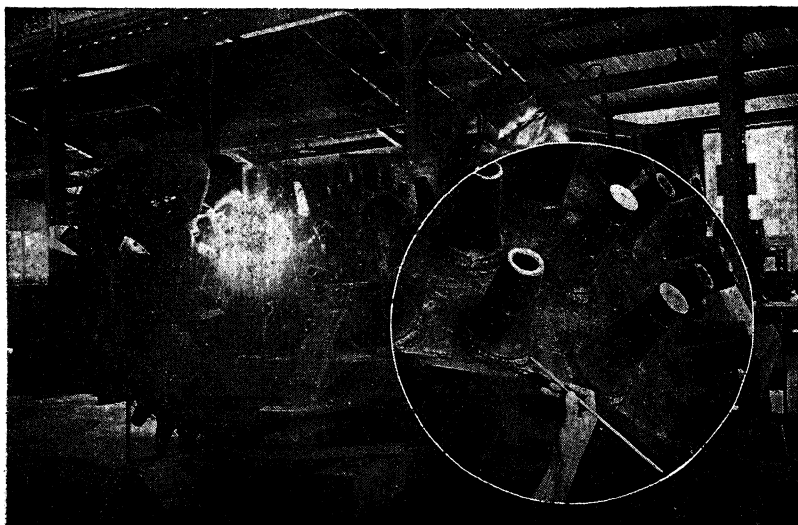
Welding on new feet on tamper used in dam construction. Old worn feet were cut off with cutting torch. New feet are welded on with two passes of shielded arc mild steel electrode. See inset.
